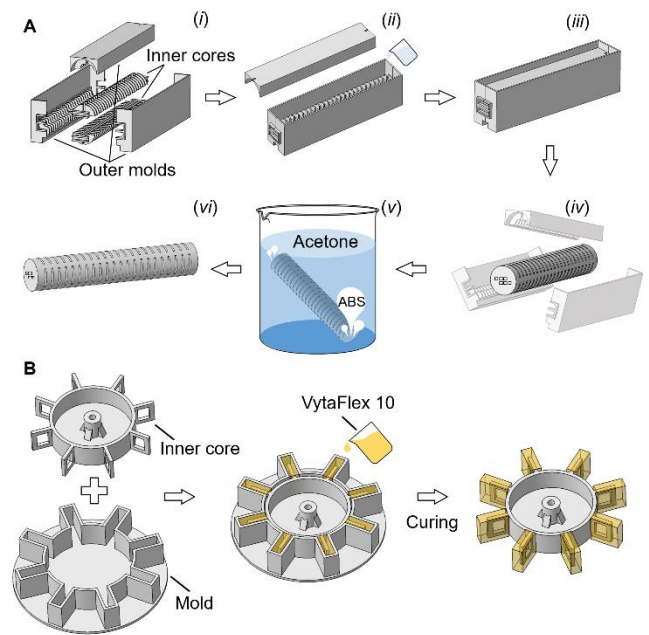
Fabrication processes of the soft body actuator (A) and the wheel leg (B).
